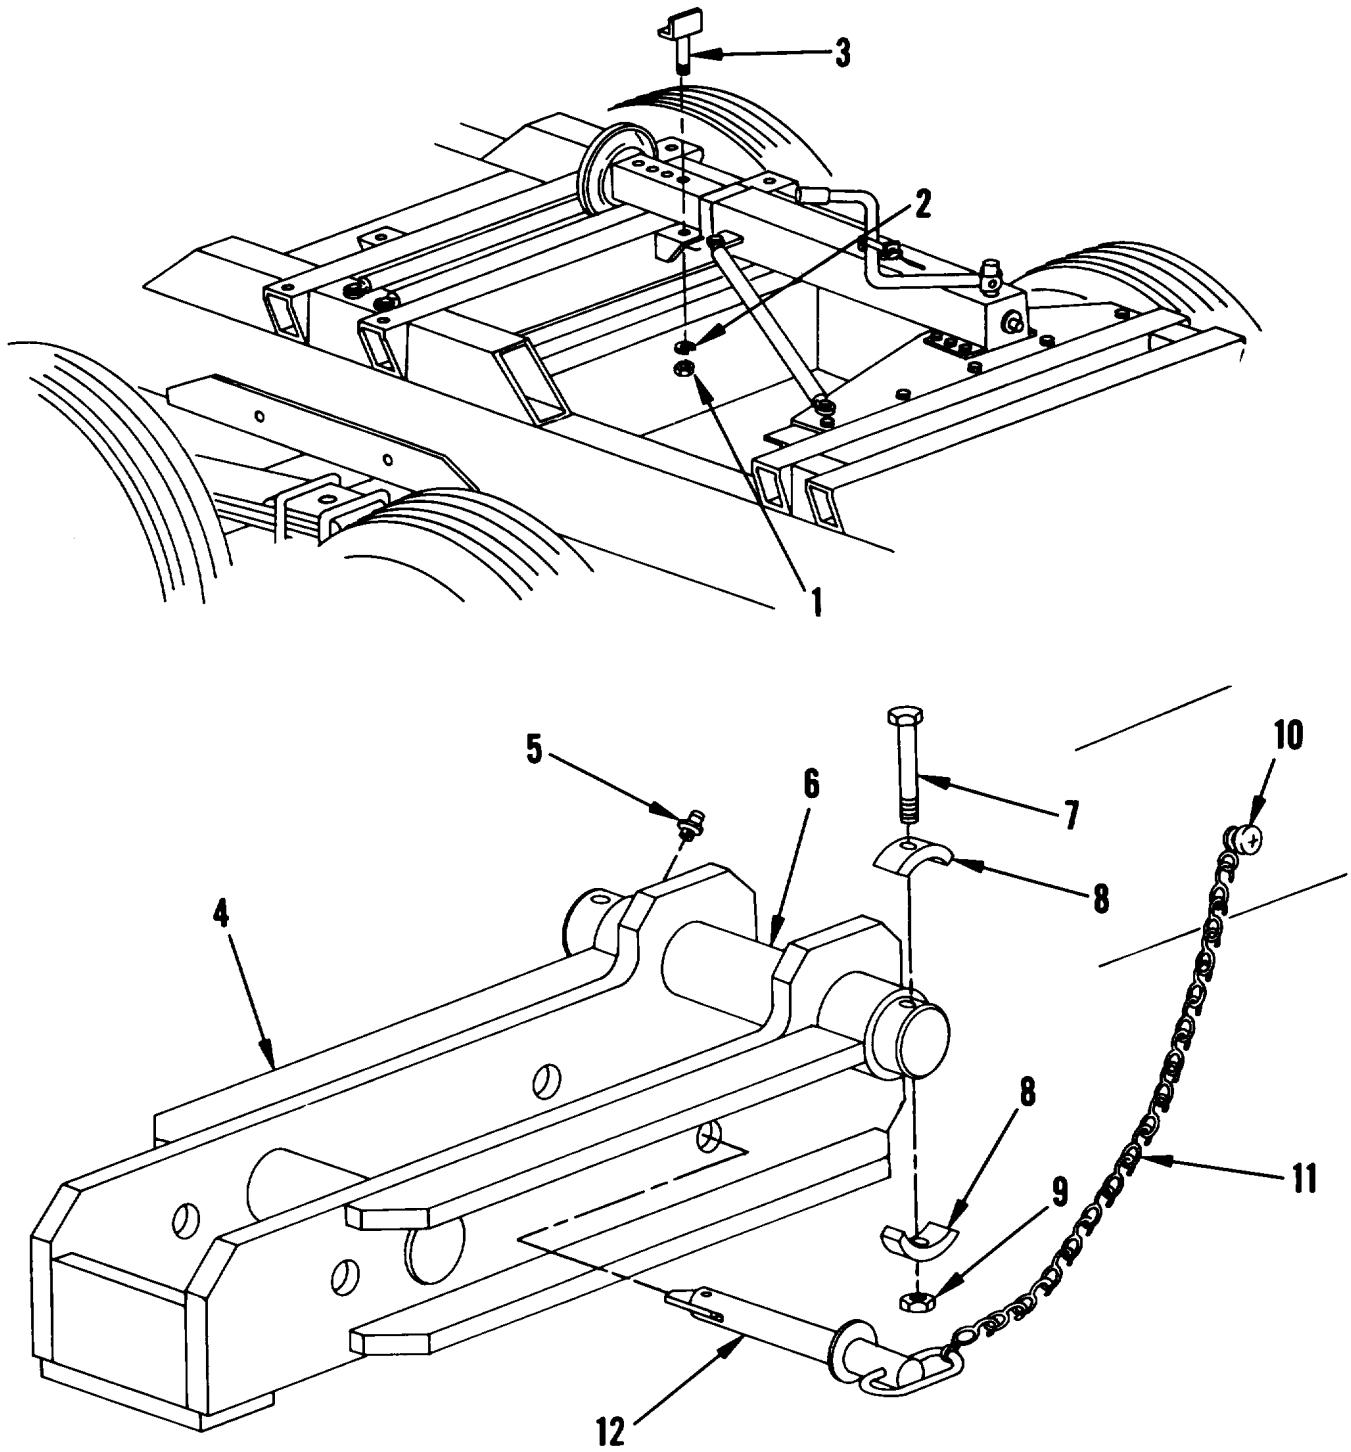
Landing Gear Stowage, Lifting Arm Assembly
